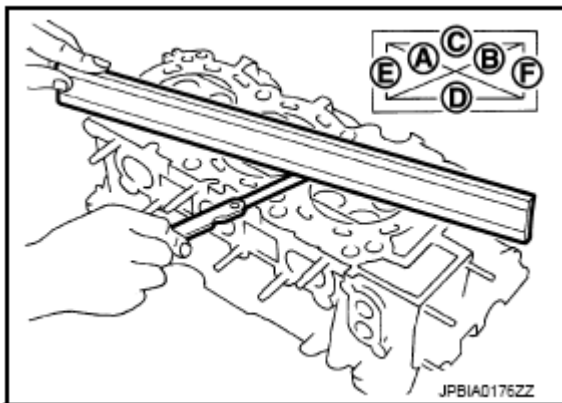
Measuring Distortion Of Cylinder Head Using Straightedge And Feeler Gauge
